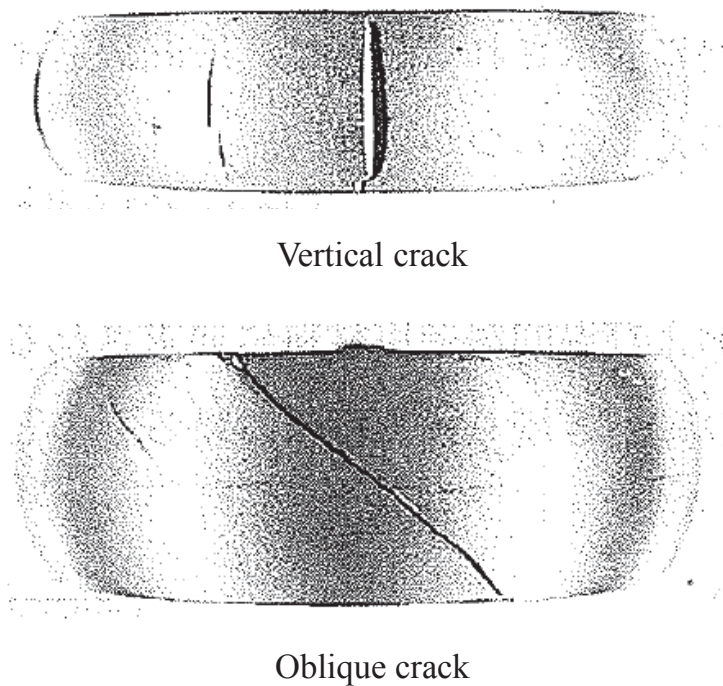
Examples of upset fracture ¹⁻⁶⁾
